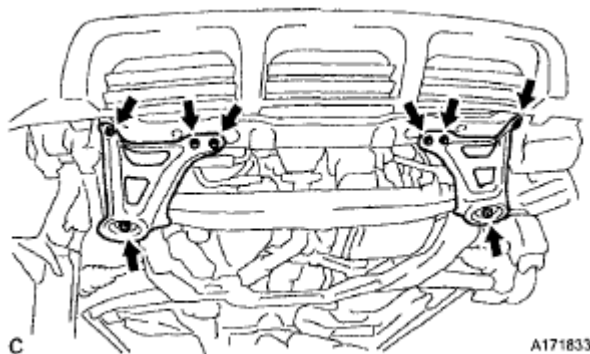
Locating Frame Side Rail Plates Bolts And Nuts (RH And LH)
